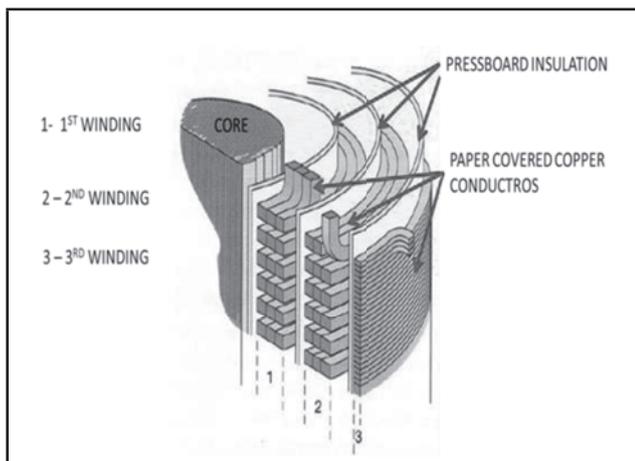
CROSS SECTION OF THE CONCENTRICALLY ARRANGED CORE-WINDING ASSEMBLY WITH MIX INSULATION - PAPER, PRESSBOARD AND ALL SURROUNDED BY OIL [8]
